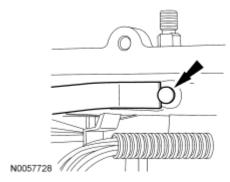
Locating TR Sensor Locking Pin Courtesy of FORD MOTOR CO.
